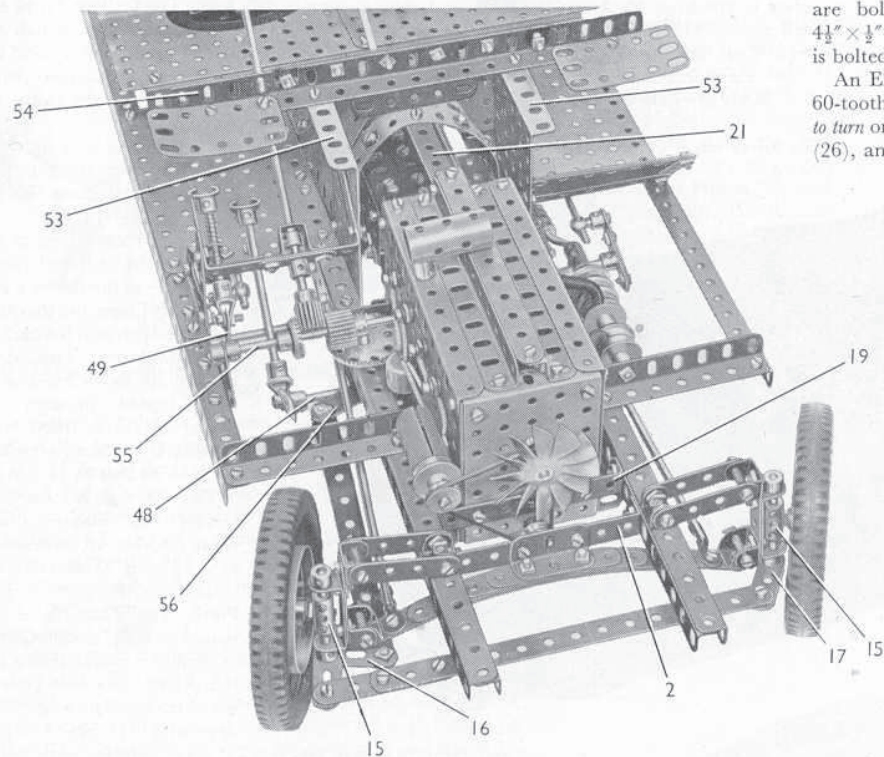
A front view of the chassis showing the steering mechanism in detail
